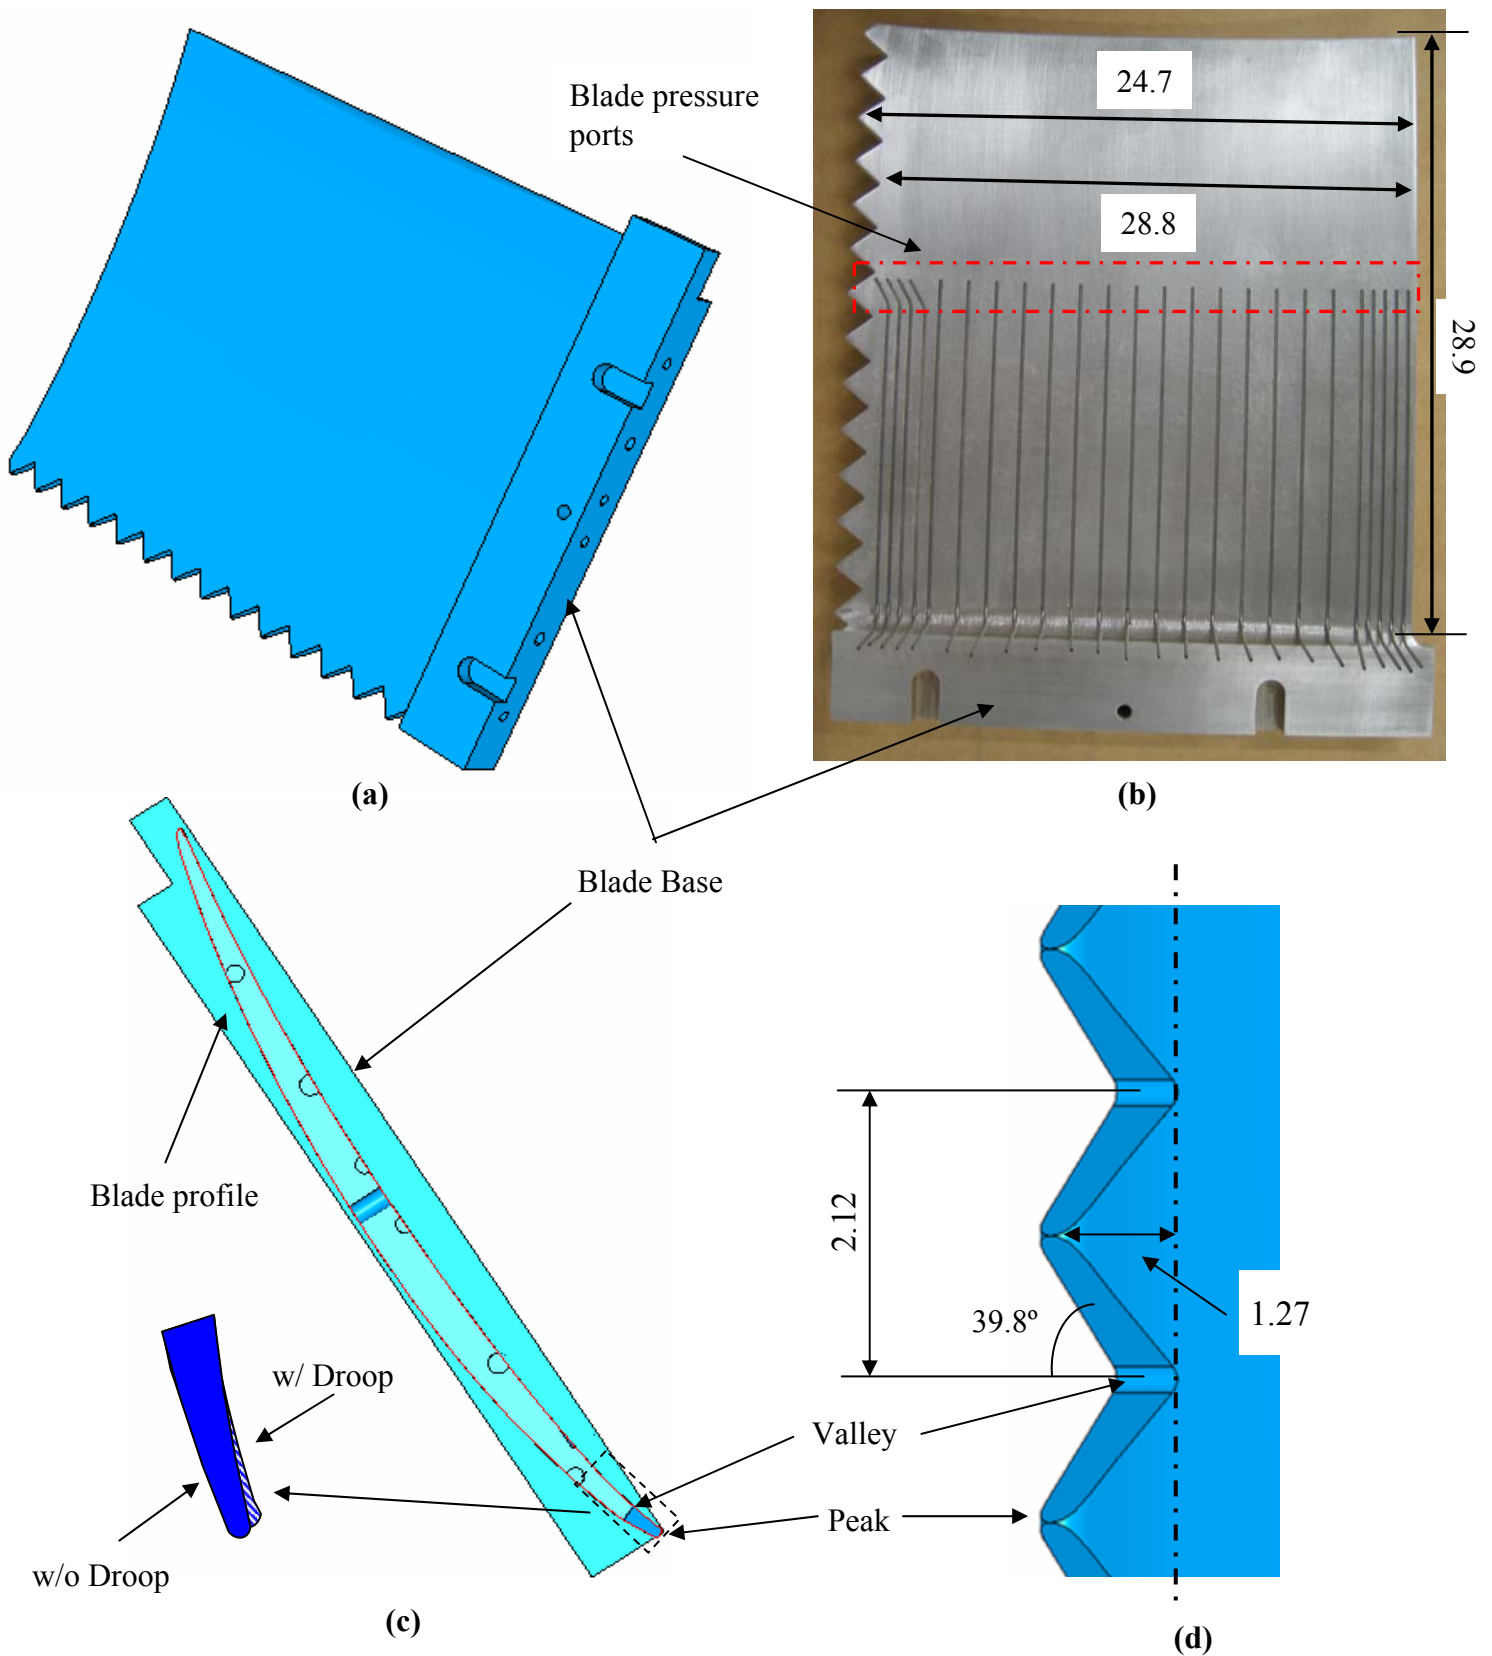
Geometric views of the 1.27 cm droop serrated trailing edge blade: (a) Isometric view (model), (b) plan view (actual), (c) tip view (model), (d) close-up of serrations (model) (all dimensions in cm)
